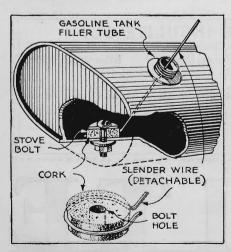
A cork, a screw, and a washer can be successfully used to repair hole in gas tank.
